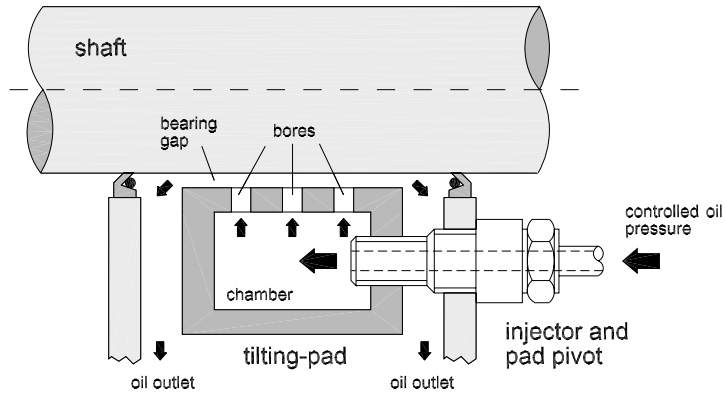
Schematic view of the oil injection system of the active tilting-pad bearing.
